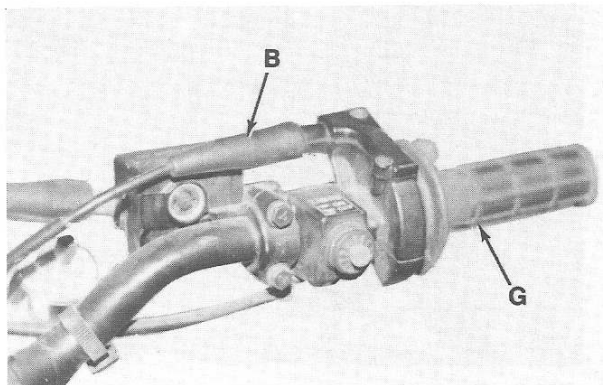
Throttle grip (G) should have 2-3 mm (0.079-0.118 in.) of free play. To adjust, slide boot (B) down cable to expose adjuster nut and locknut.
